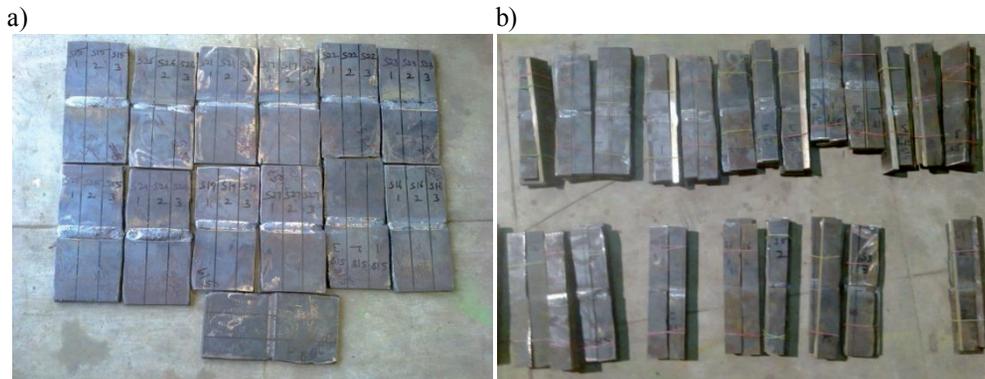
a) Sample workpiece before cutting; b) sample workpiece before polished
